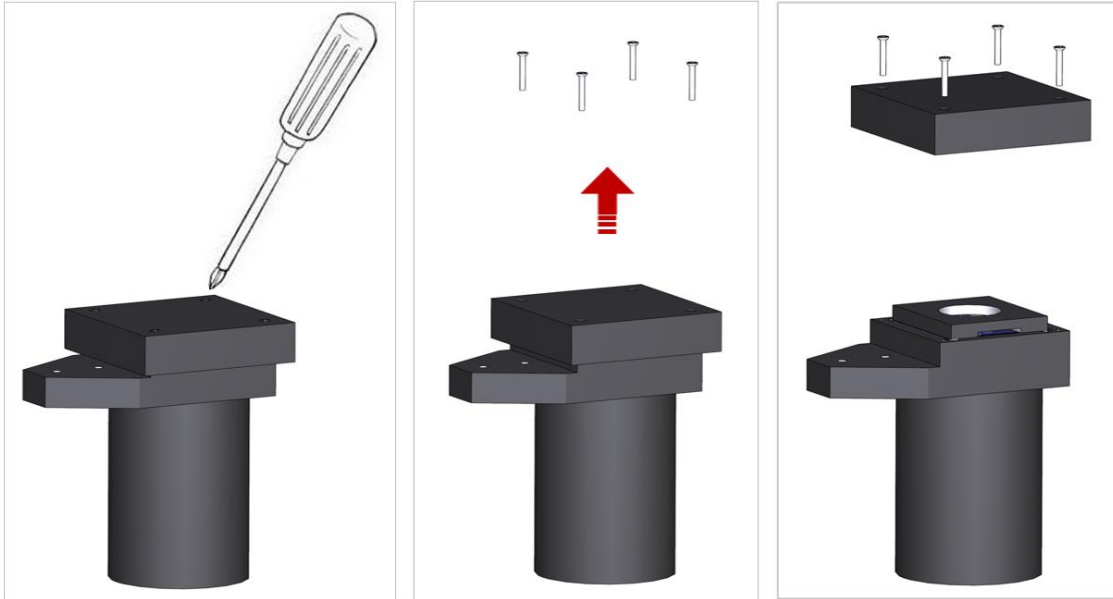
Assembling tools for SP5608 – Scintillating tile.
